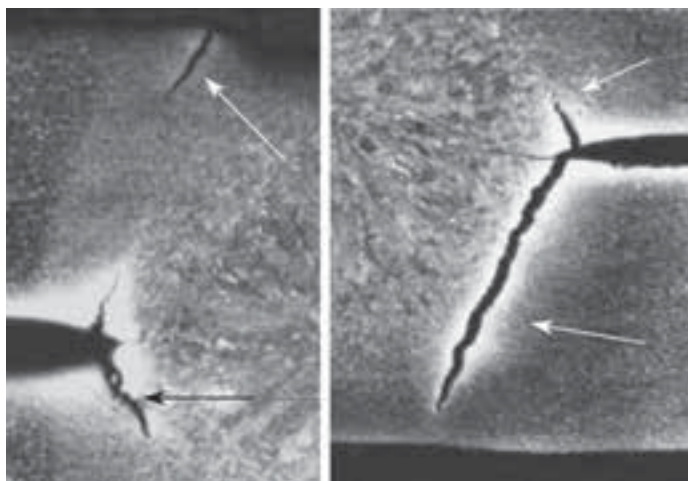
Appearance of cold cracking in the heat-affected zone of spot-welded DP780 (0.15% C) [30].
